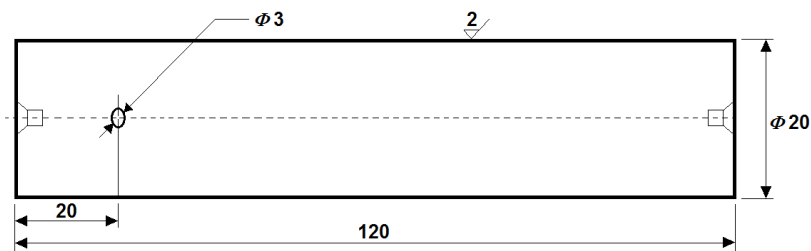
Standard round bar test piece used in this investigation to determine the carbon profile after carburising (all dimensions in mm).
